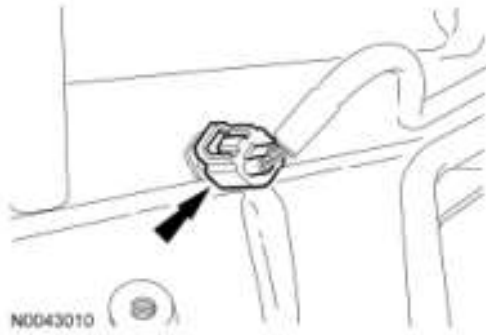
Locating Knock Sensor (KS) Electrical Connector
